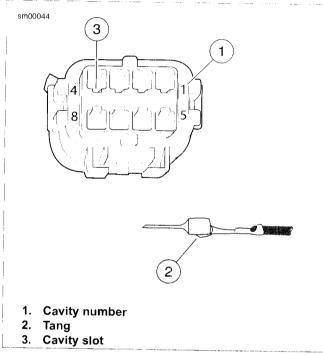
Molex Connector: Pin Cavities and Wire Terminal
